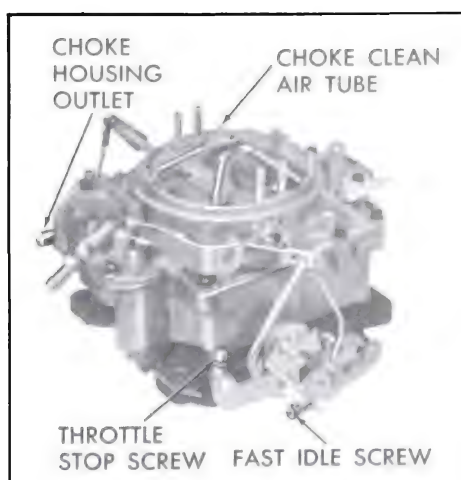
Rochester 4-Barrel Carburetor-401 Engine
